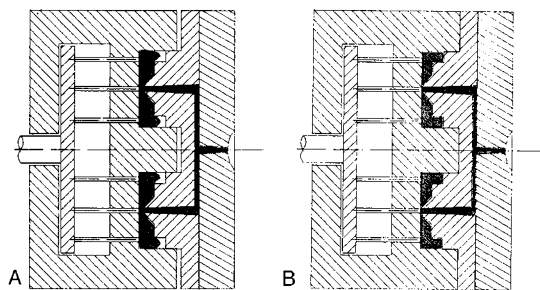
Multi-cavity injection-compression mold with immersion gating
